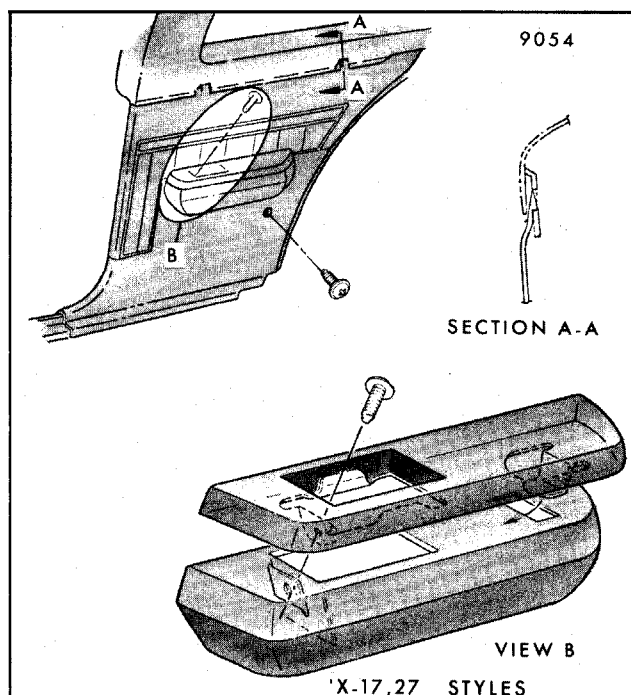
Quarter Trim and Armrest Attachment - "X-17,27" Styles
